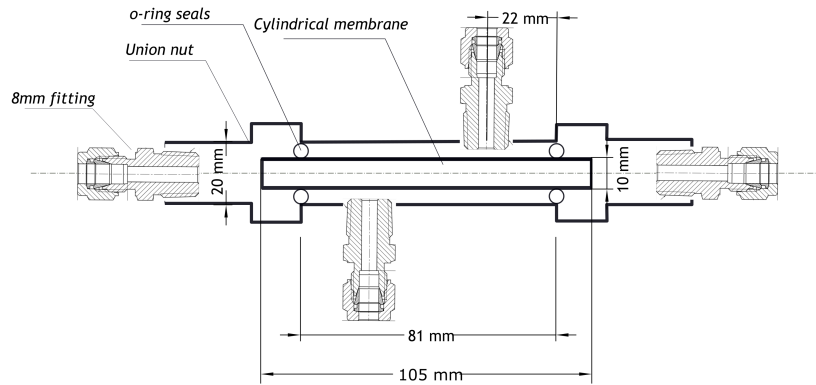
Technical drawing of the permeation testing cell manufactured by Fraunhofer IKTS. Drawing: own work.
